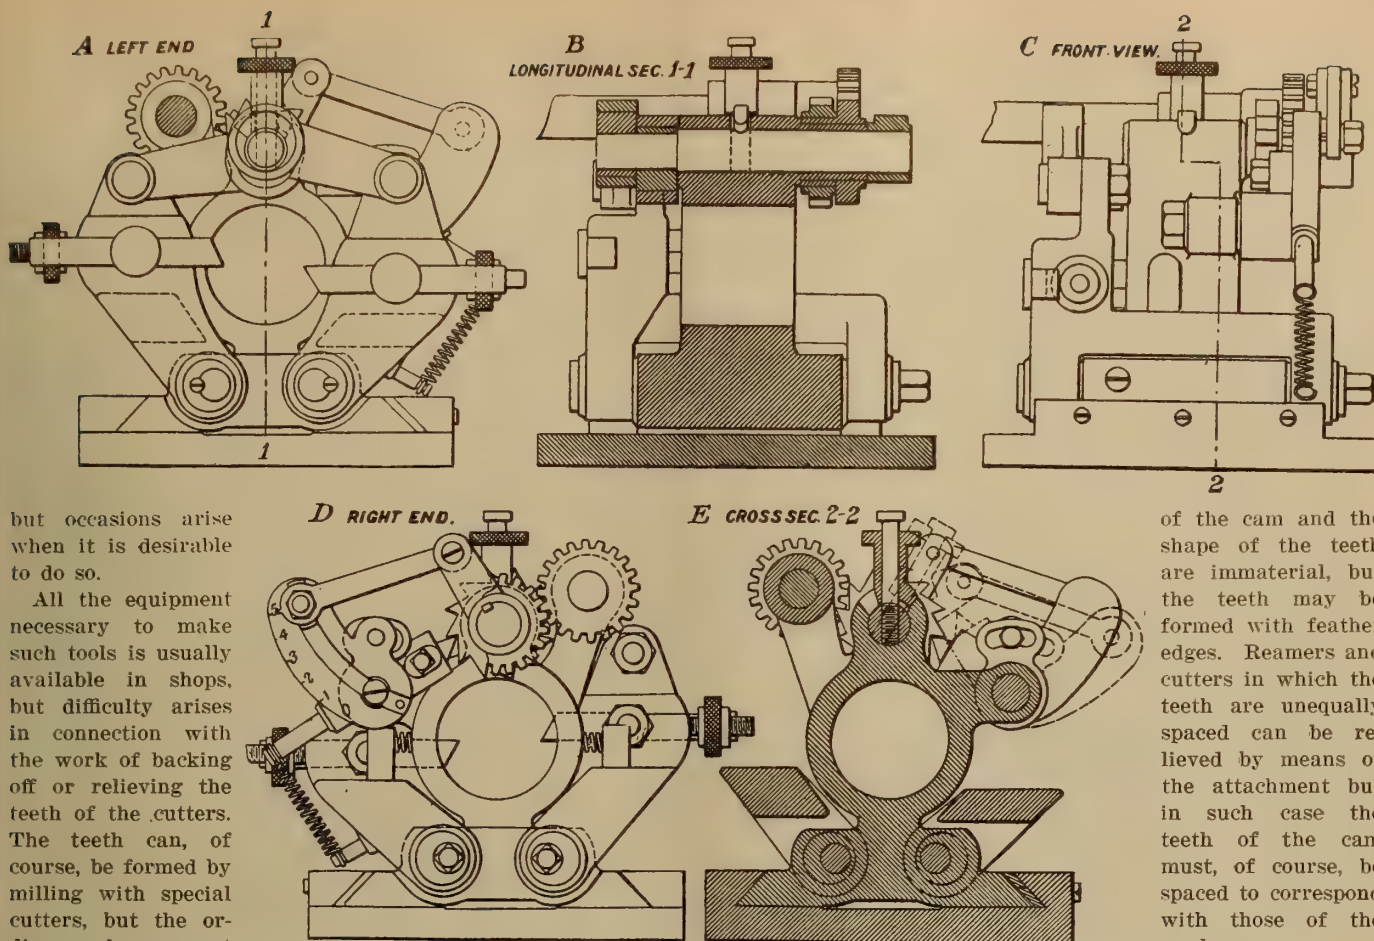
MILTON RELIEVING ATTACHMENT FOR LATHES
